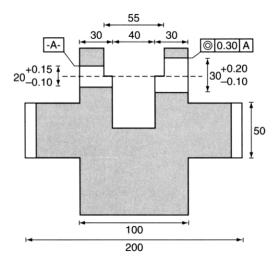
Dimensions and tolerances for the socket P_0 .
